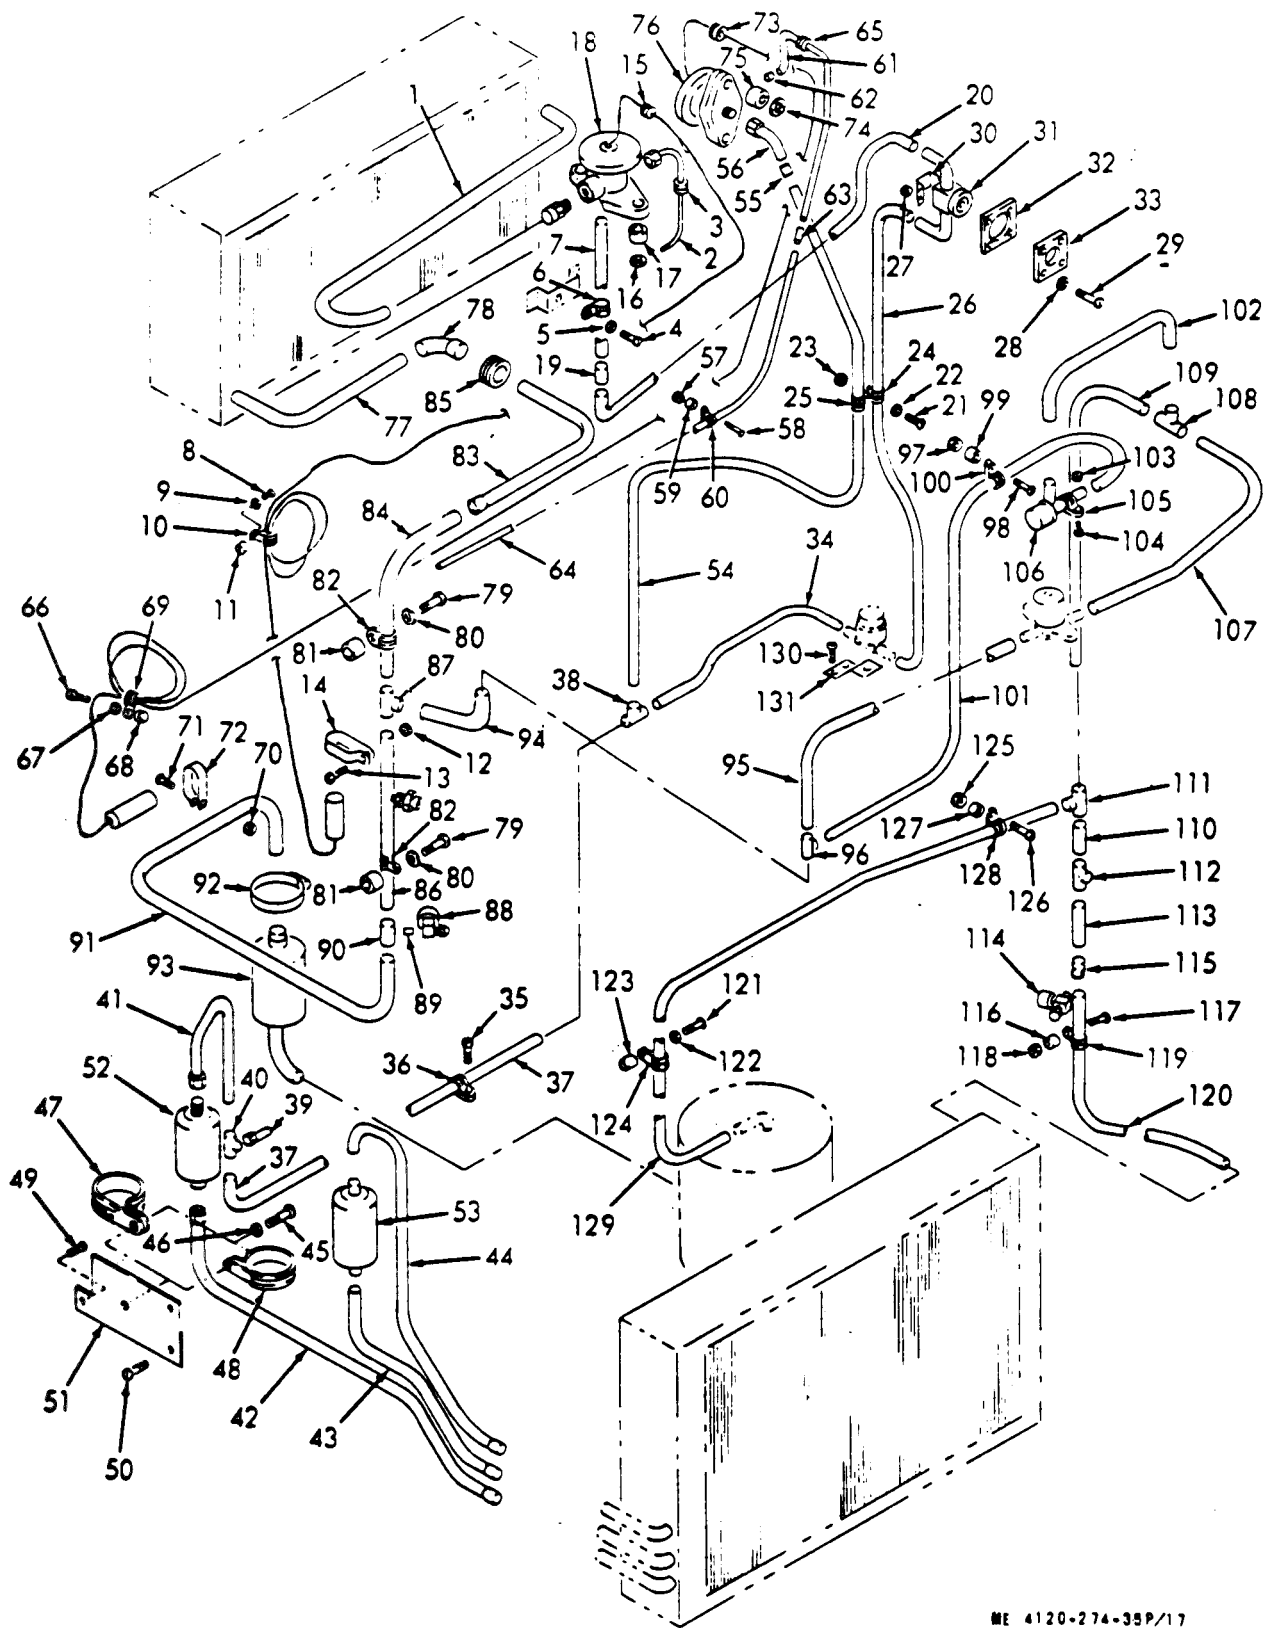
EVAPORATOR AND CONDENSER COILS AND MOUNTING
